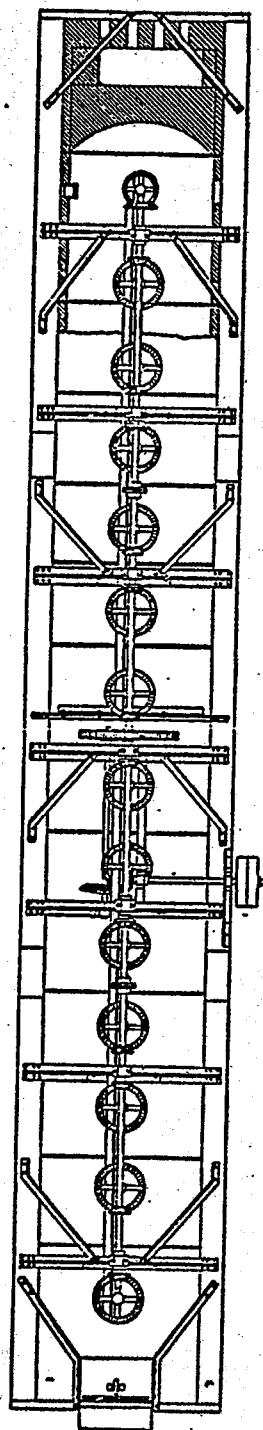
Plan of Furnace Part in section, showing Fireplace and Discharge Opening.
